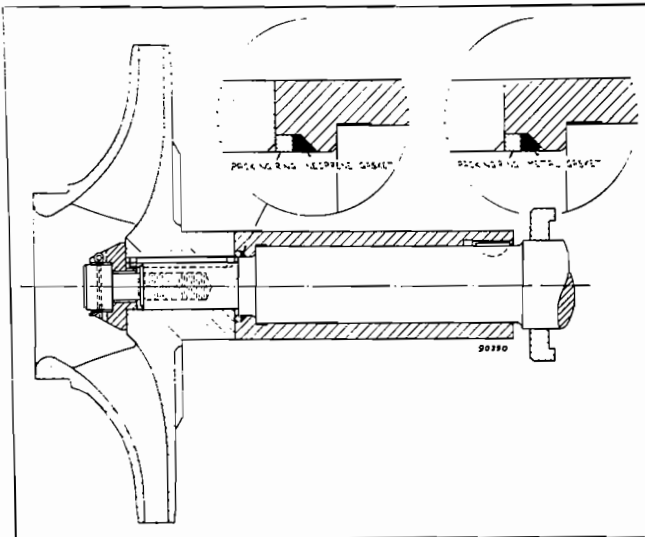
Attachment Method—Impeller and Hook Type Shaft Sleeve.
